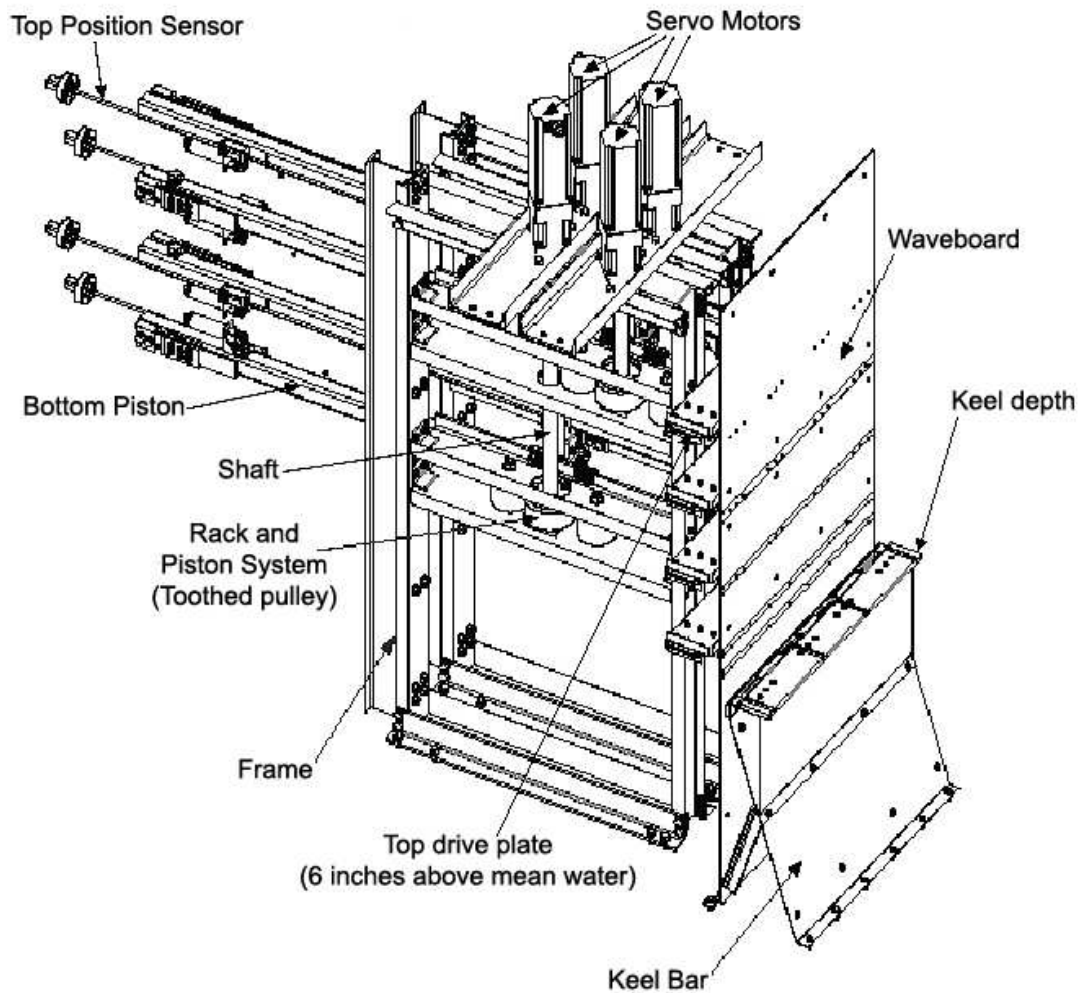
A schematic drawing of the wave maker designed and manufactured by MTS system corporation
